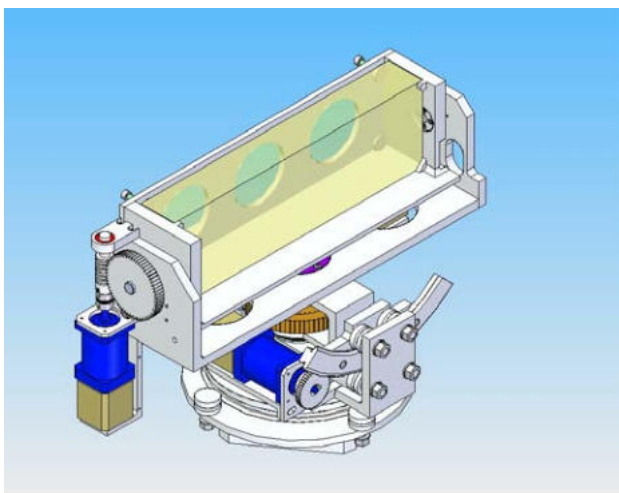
Three dimensional view of the mount design for the second grating of the pulse compressor in ATA 2.
